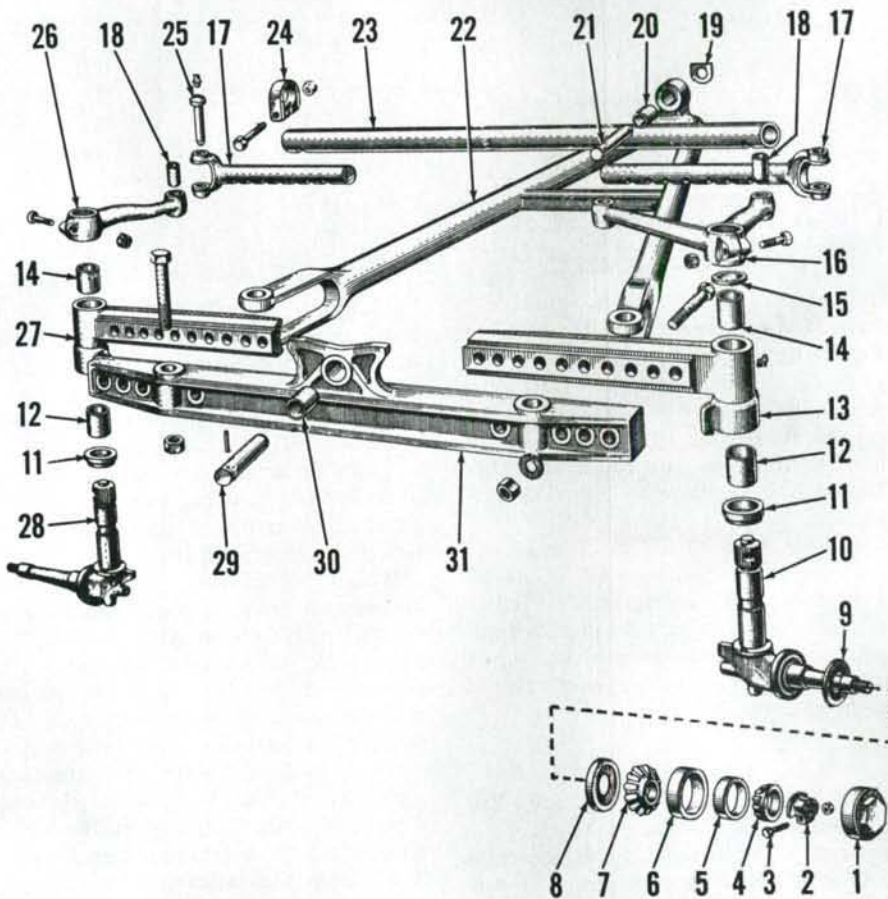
Exploded view of adjustable front axle, radius rod, tie rod and steering arms for models "FSM" and "New FSM". Front axle assembly for earlier models "FMD" and "FPM" is similar except thrust washers are used on trunnion (29) at each side of axle center member (31) and thrust washer (19) is not used on radius rod pivot pin (21).
